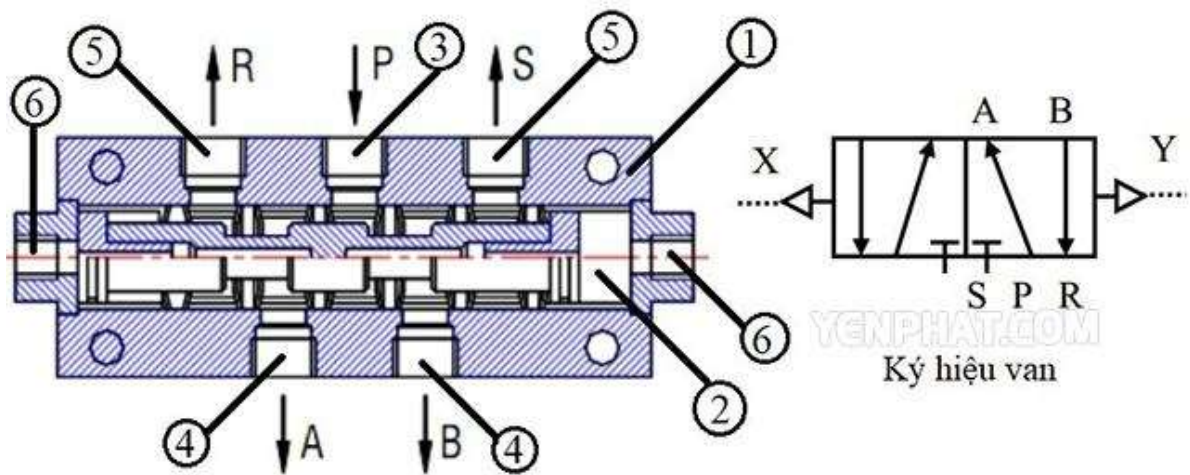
Structure of 5/2 valve (Source: Internet)
